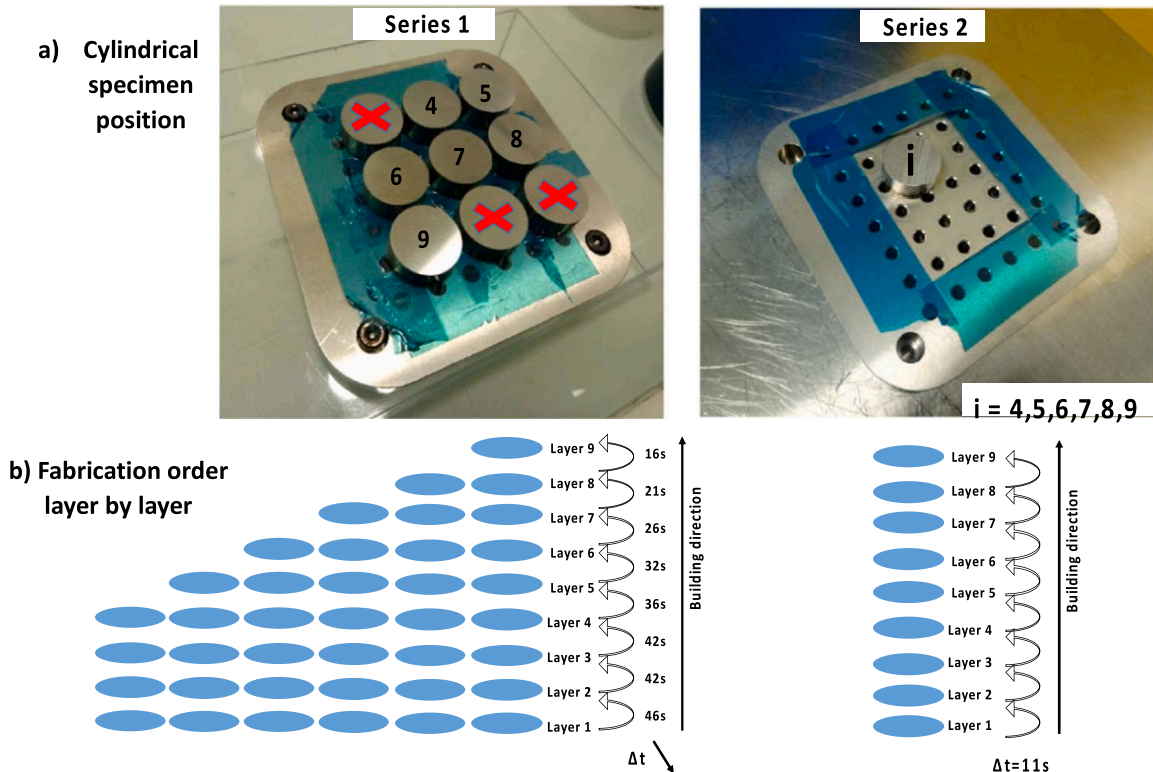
Fabrication order: a) substrate cylindrical specimen position on the SLM manufacturing tray and b) fabrication order layer per layer for: Series 1: several specimens per fabrication - Series 2: one specimen per fabrication.
